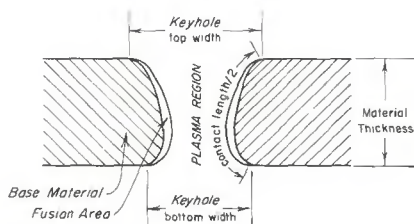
Measurement of keyhole top width, bottom width, and contact length. During welding the fusion area is liquid
